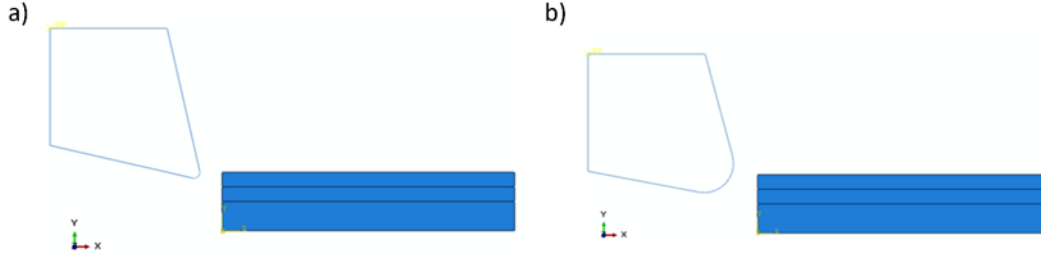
Assembly of the instances for the two models: a) tool with edge radius 1 μm and b) tool with edge radius 5 μm .
